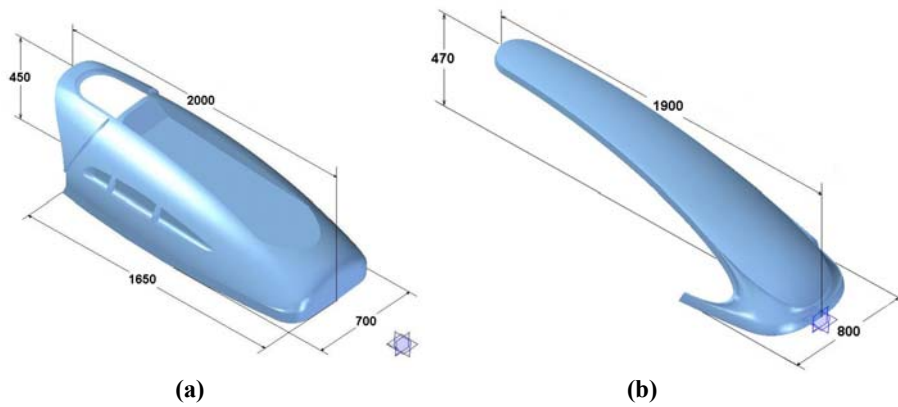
Parametrical 3D CAD model of the Polycarbonate and ABS parts
